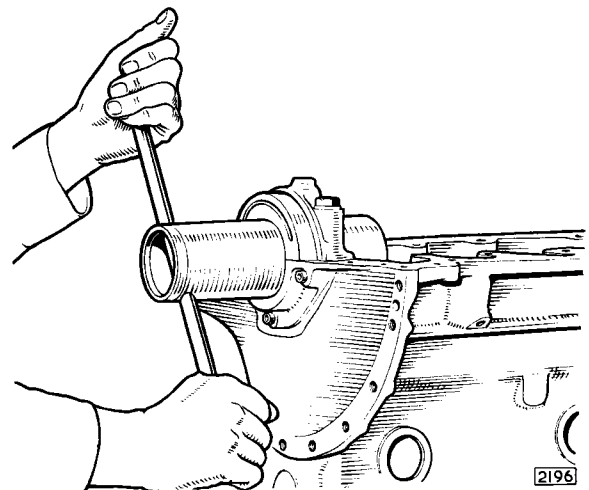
Sizing the rear oil seal using Churchill Tool No. J.17
